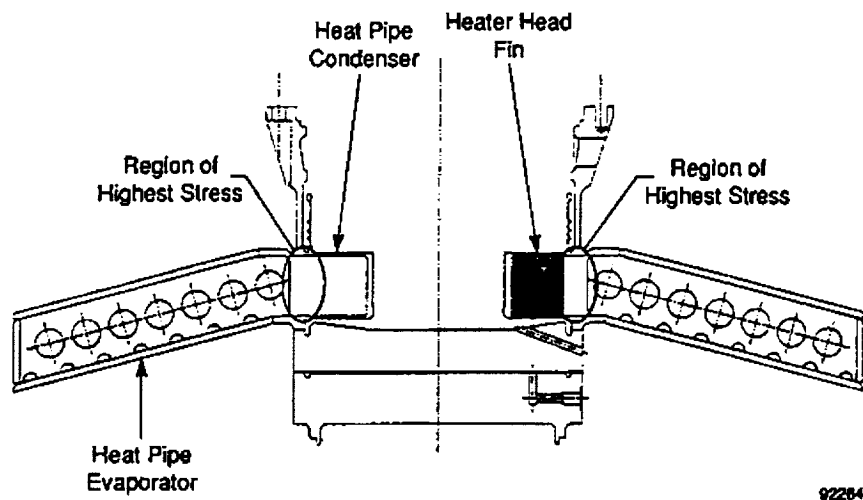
Component Test Power Converter (CTPC) Heater Head and Heat Pipe System Cross Section
